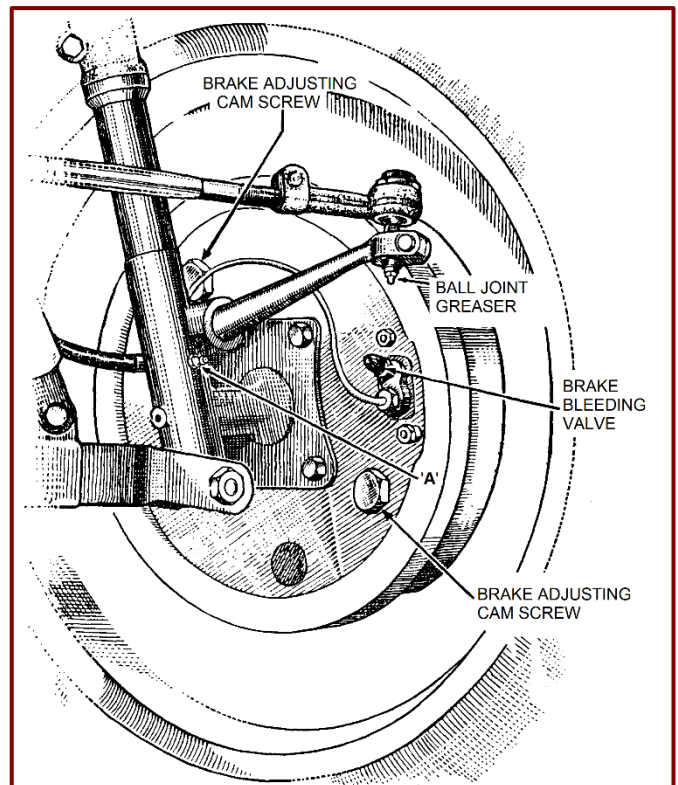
Front Brake Adjusters. 'A' – Swivel Pin Greaser.
